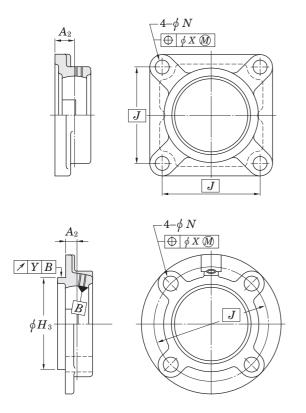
Dimensions relative to installation of housing with tolerance and permissible value (representative example)
